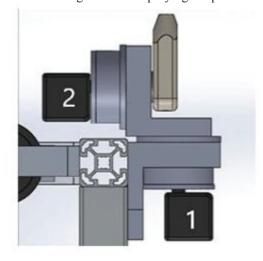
Side view of the spraying unit with servo motors and nozzle
